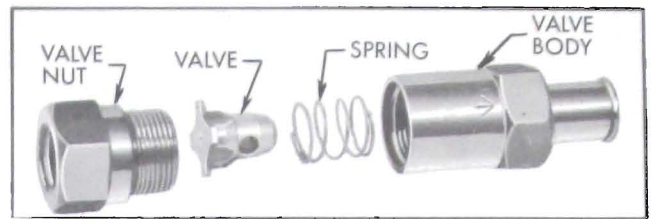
Positive Crankcase Ventilator Check Valve—Exploded View
